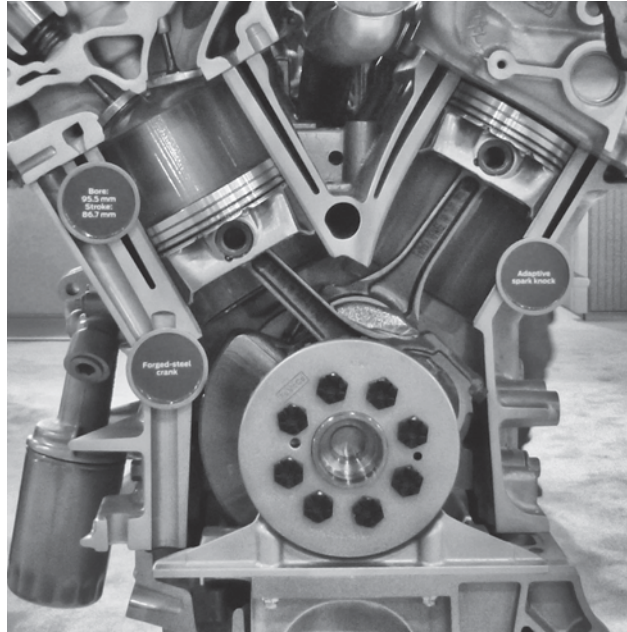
Critical layout dimensions defining minimum package size for a vee engine
